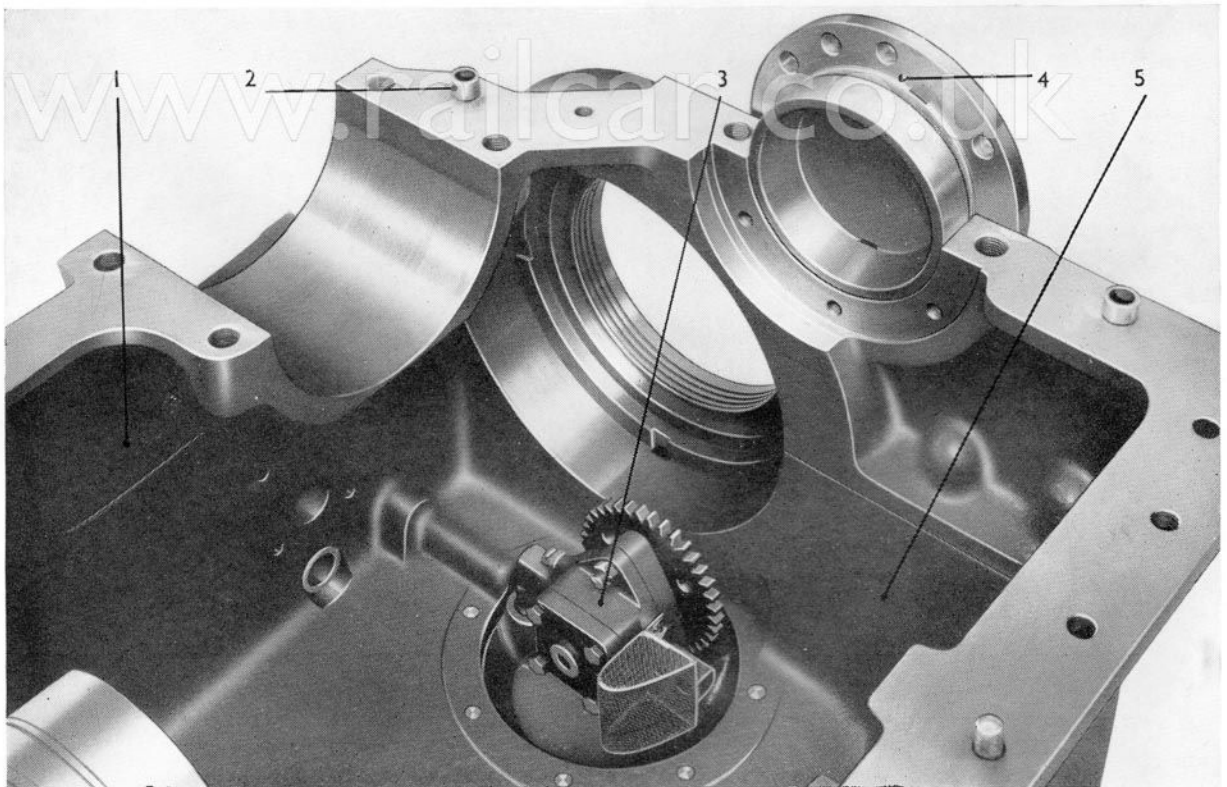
View of Oil Pump located in bottom portion of Gearcase.
